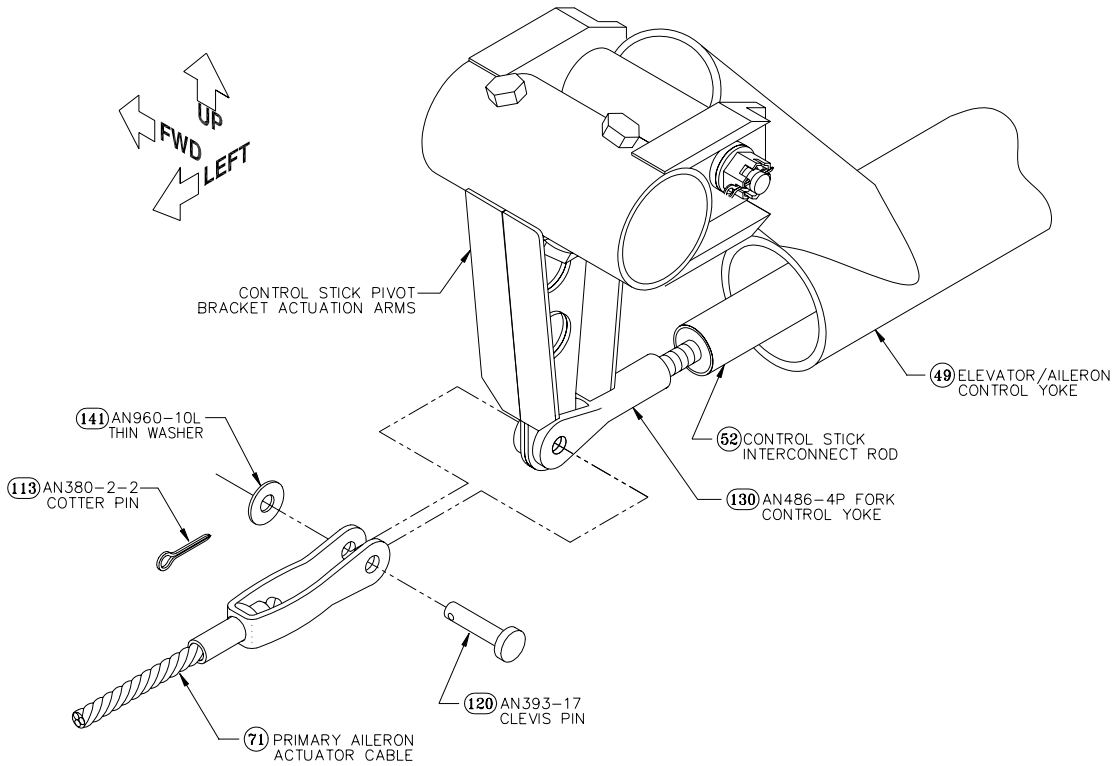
Aileron Control Cable Attachment to Control Stick Assembly
